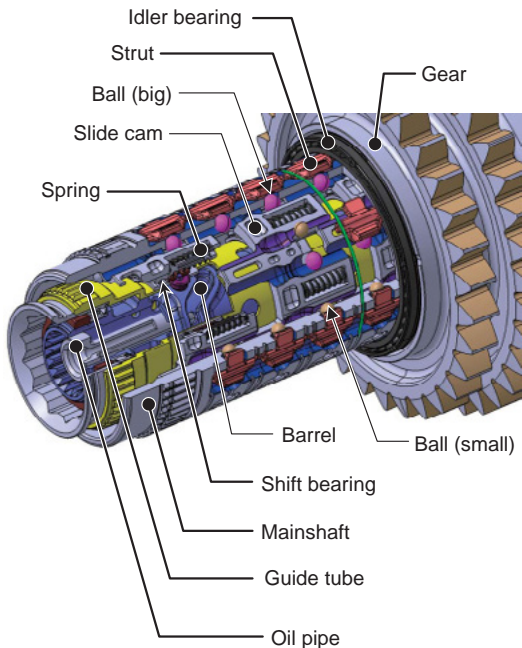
Parts configuration of in-shaft seamless shift mechanism
